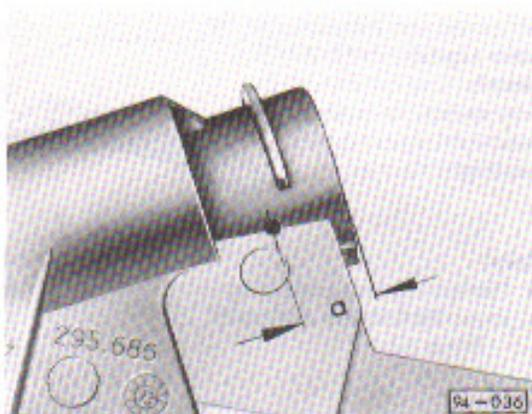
Steering column lock housing (11.75 up to 9.79)
